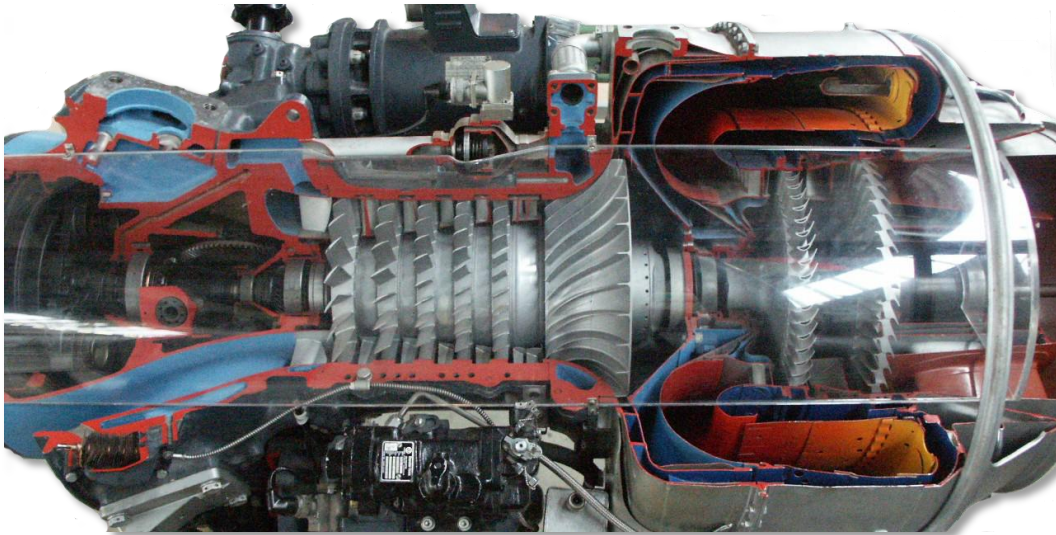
Internal layout of the T53-L-13B engine (2 of 2).
